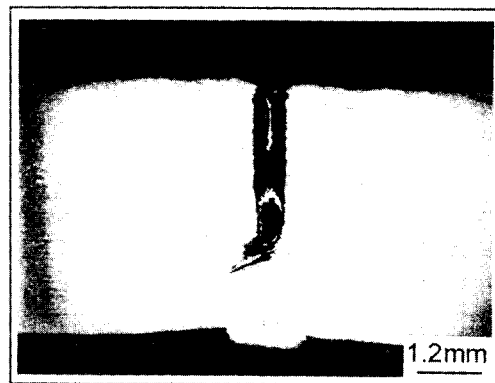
An example of cavity defect after welding with AC type mixed gas
